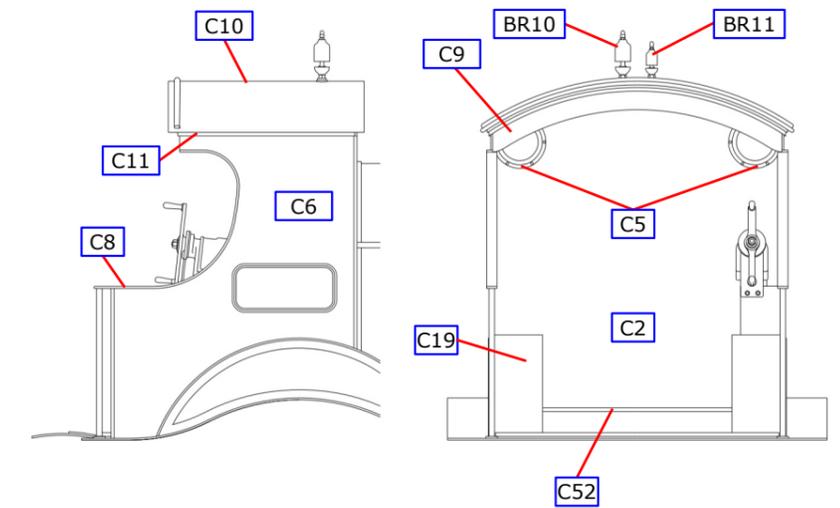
Narrow Cab, B4 Boiler, Wooden Roof
